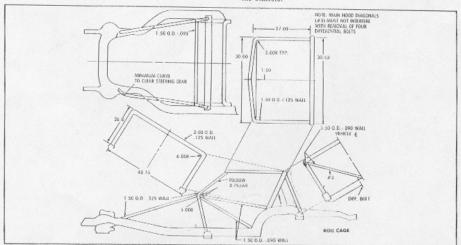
Typical roll cage welded to the frame assembly.
